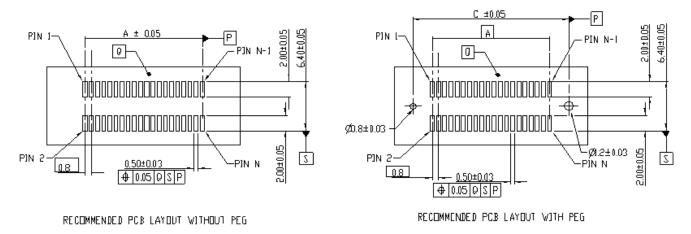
Recommended PCB layout for Receptacles 1 and Plug 1 to 4.
